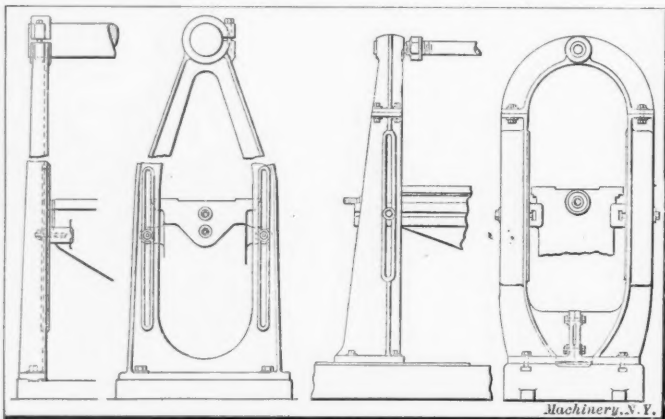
Brace uniting Base, Knee and Overhanging Arm. Fig. 25. Loop Form of Bracing uniting Base, Knee and Work-arbor
